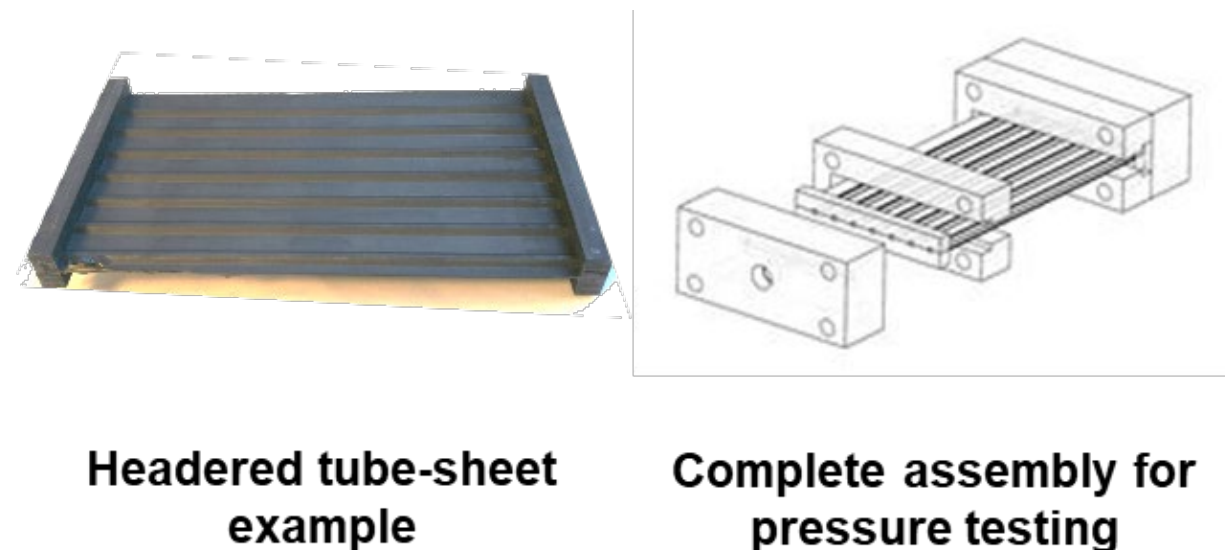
Headered tube-sheet joining and assembly for proof pressure testing.
